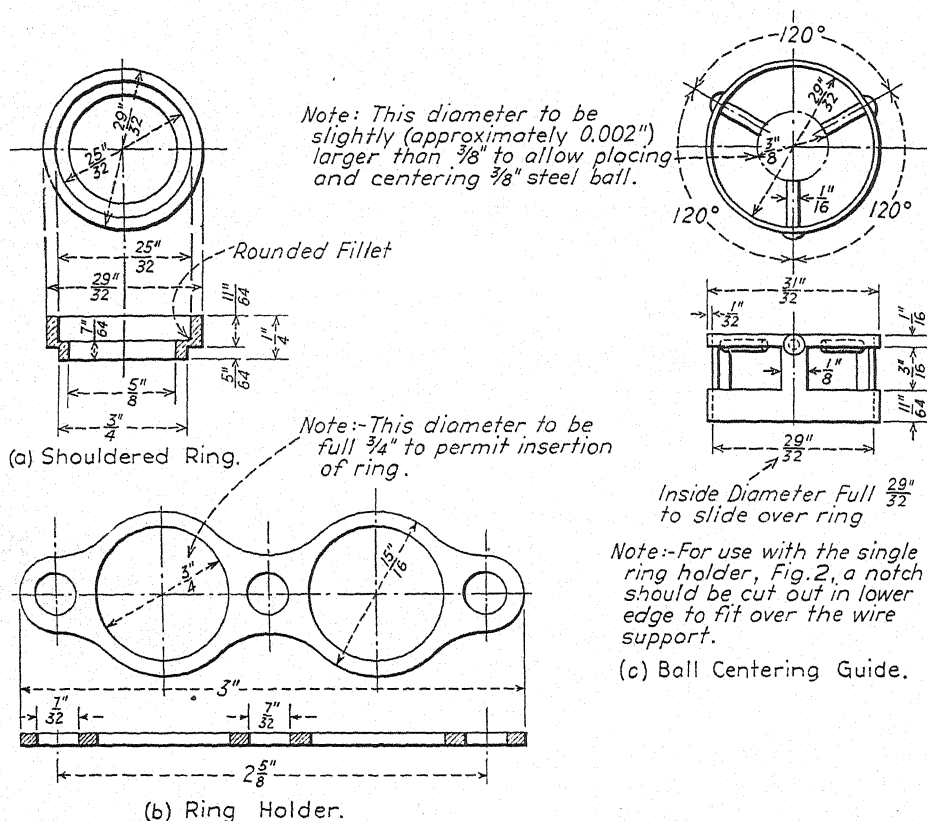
Shouldered Ring, Ring Holder, and Ball-Centering Guide.
